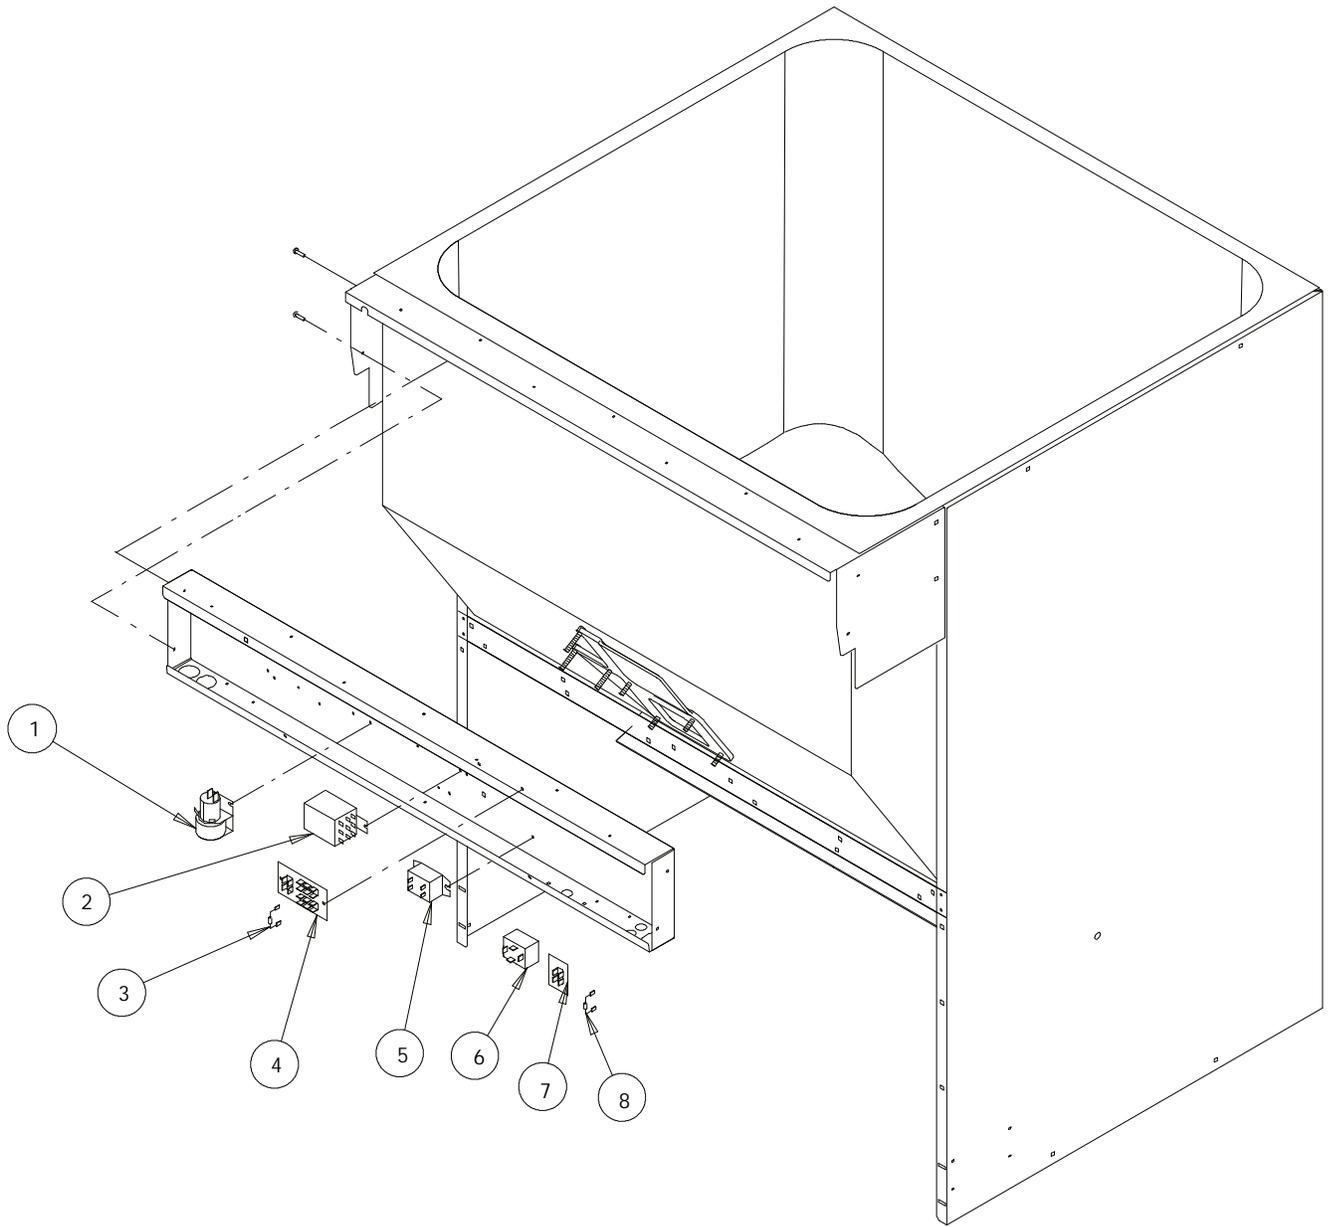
ELECTRICAL CONTROL BOX ASSEMBLY - EXPLODED VIEW AND PARTS LIST
